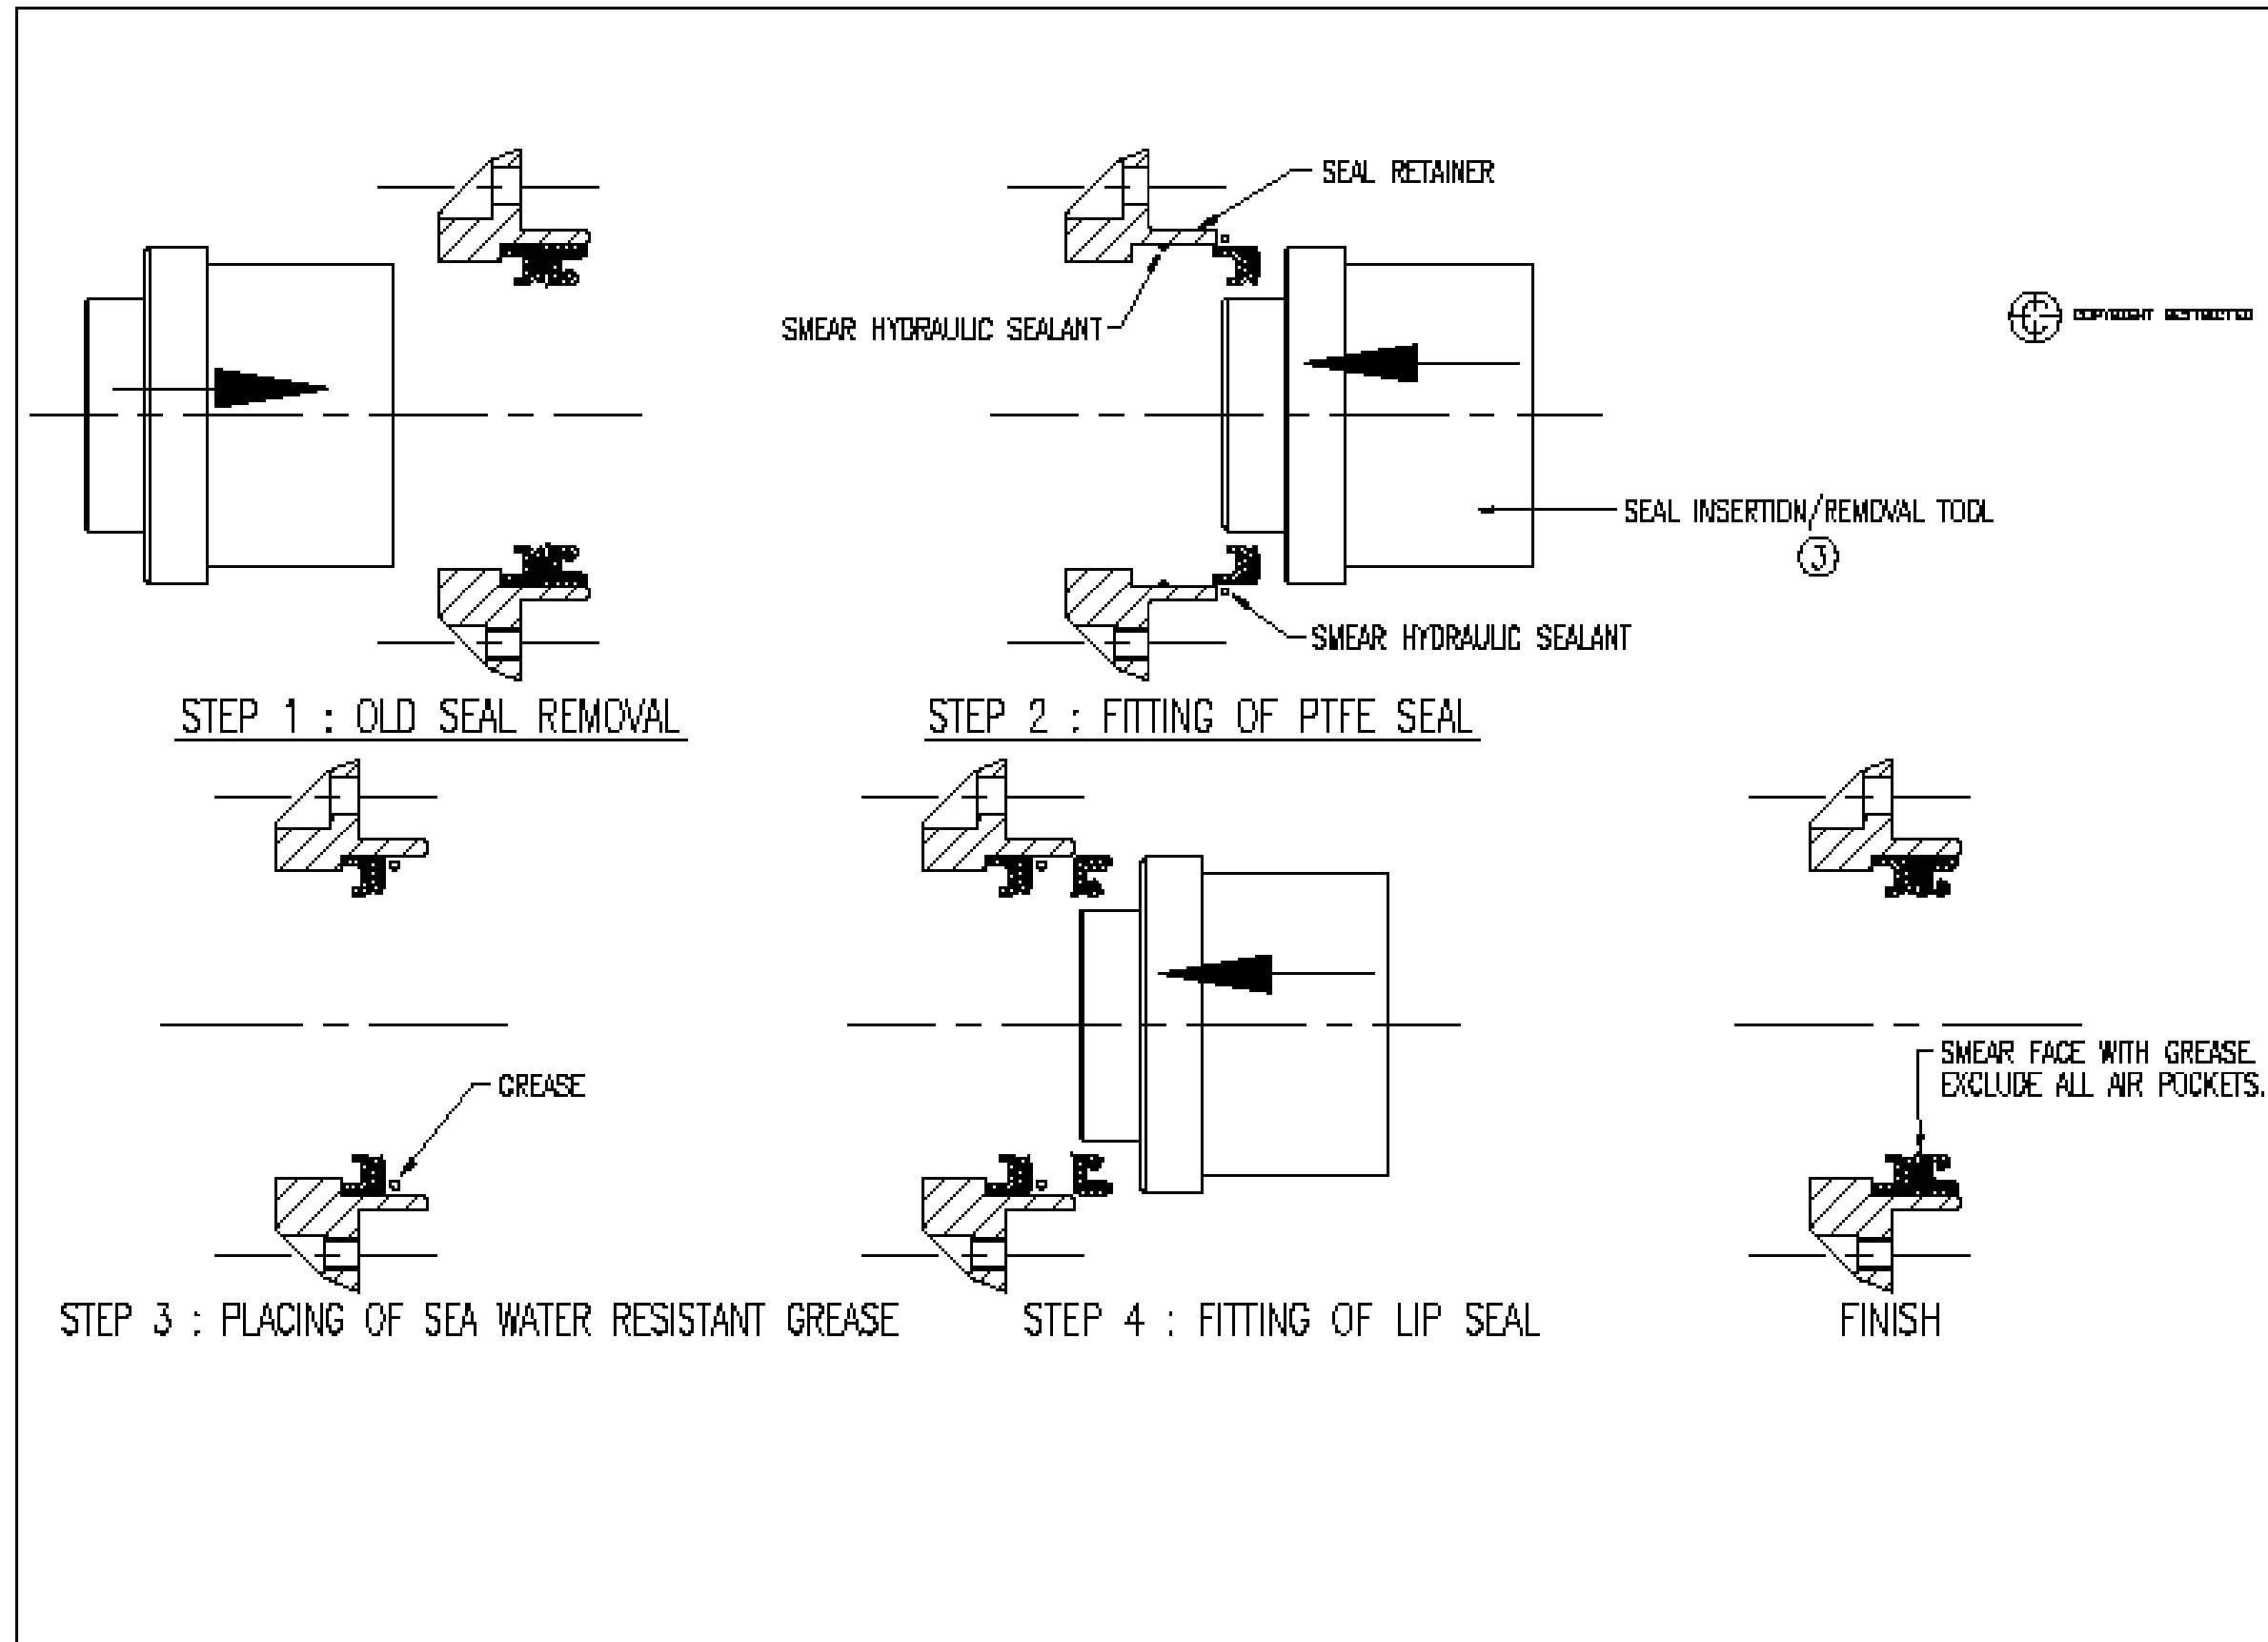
Curvetech Thruster Removal & Fitting Of Seals Into Seal Retainer
